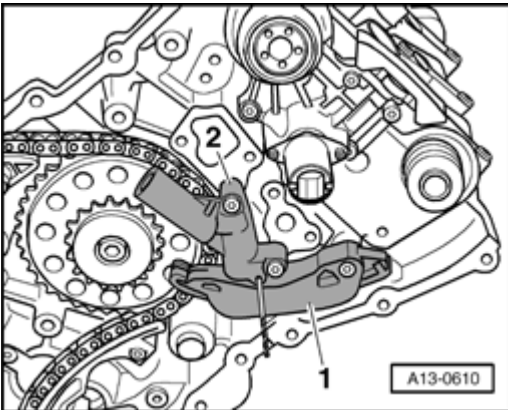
Removing Glide Track At Right Cylinder Head & Chain Tensioner
